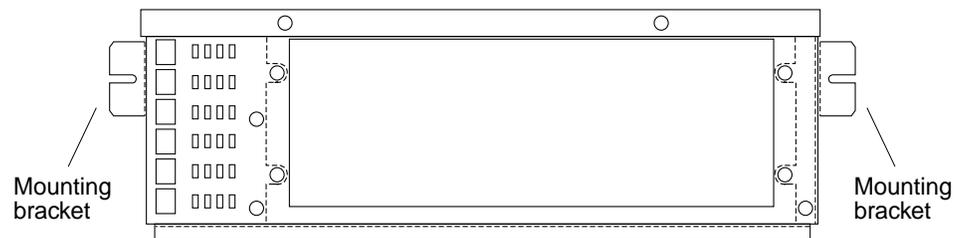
Securing the Tray Assembly in the Cabinet — Front View
